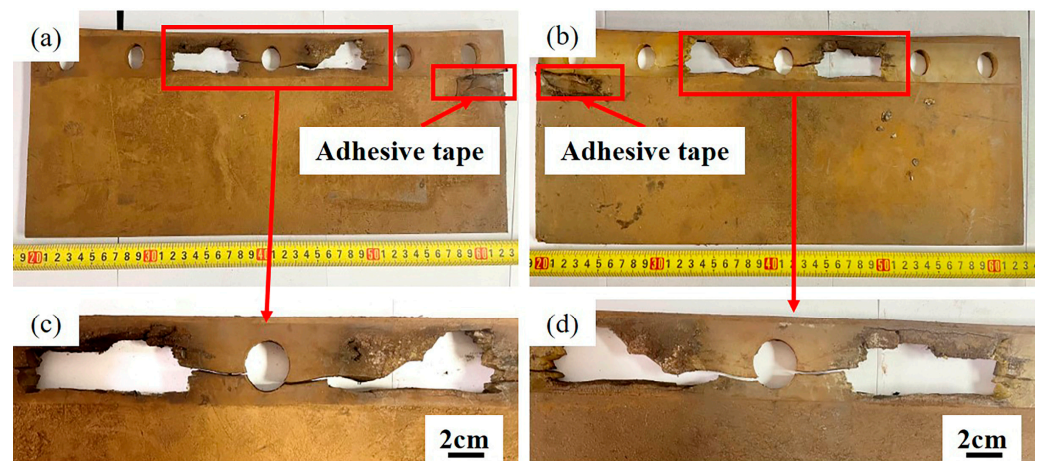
Appearance of Sample 2#: (a) overall appearance of the front side; (b) overall appearance of the back side; (c) cracks on the front side after partial enlargement; (d) cracks on the back side after partial enlargement.
